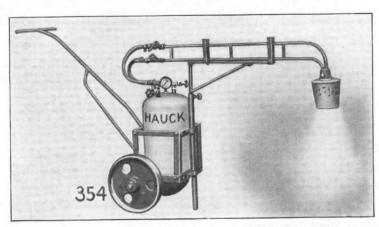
The Hauck ladle heating outfit which burns kerosene, fuel oil, or crude oil in conjunction with compressed air.
